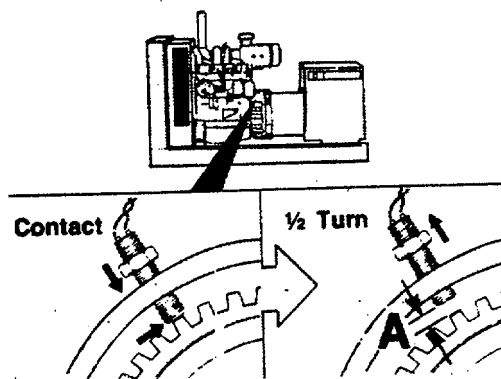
Magnetic Speed Sensor Adjustment.
